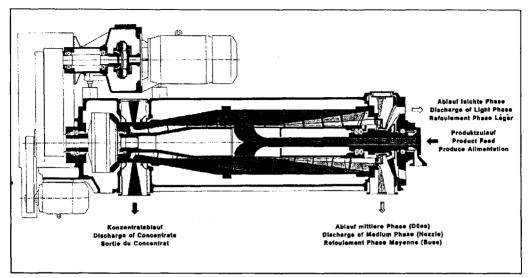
shows a 3-phase-decanter type CA 755 with a 2-gear-drive and an installed centripetal pump.
